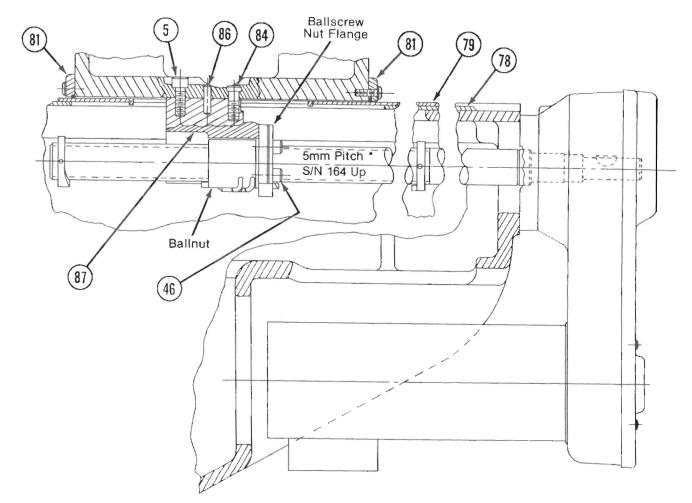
Y-Axis Ballscrew Removal/Installation
